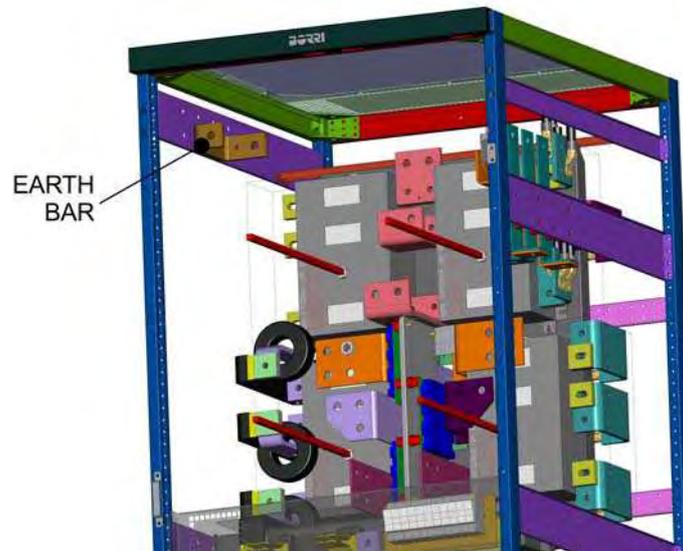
600-800kVA UPSaver, I/O module terminal boards (bottom cables entry)
